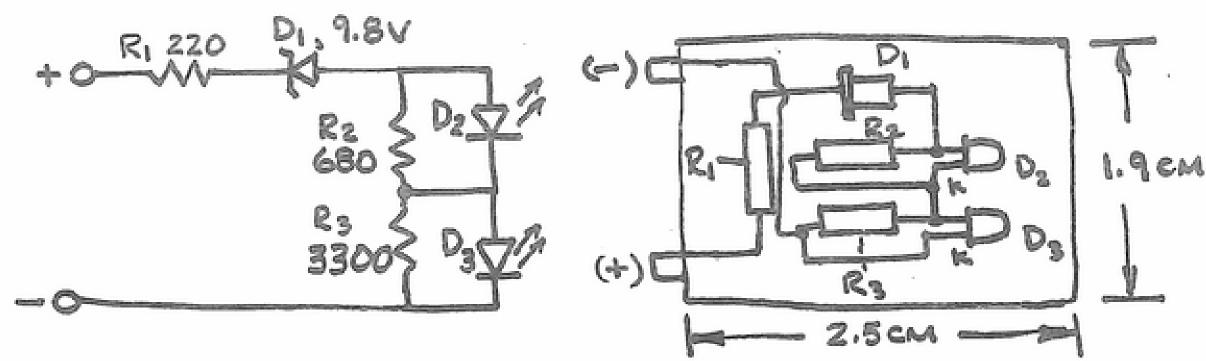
SCHEMATIC AND PARTS PLACEMENT
